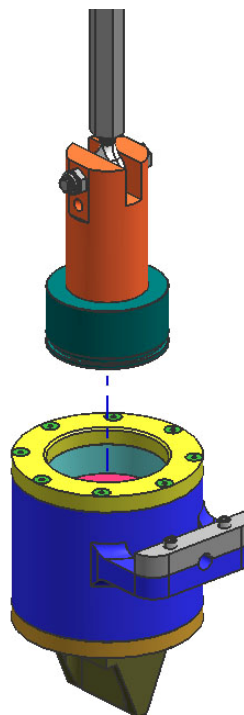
The piston sub-assembly with the rheometer body sub-assembly
